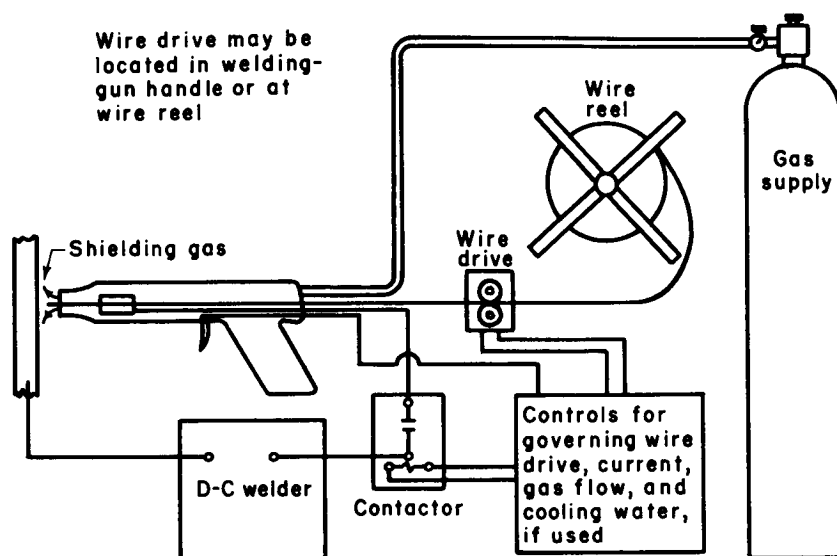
GAS-METAL-ARC-WELDING PROCESS
